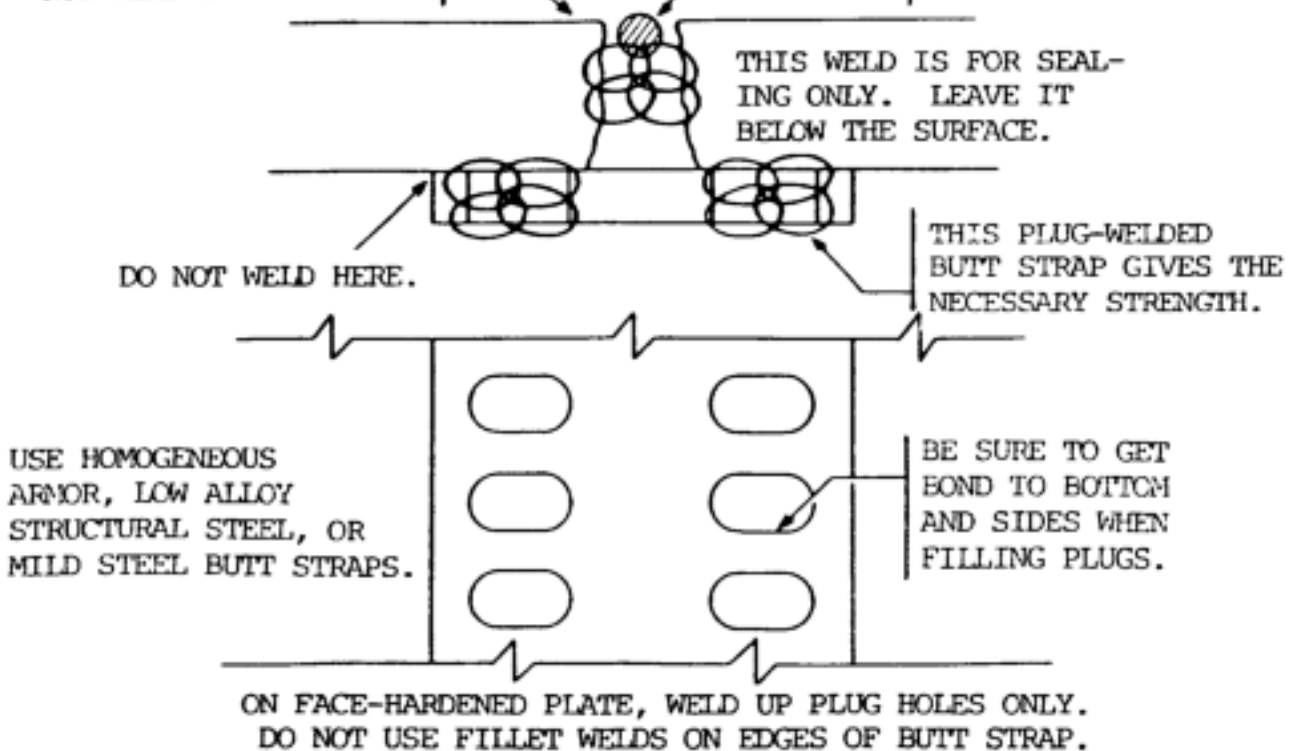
Use of butt strap on face hardened armor to repair cracks or gaps.
